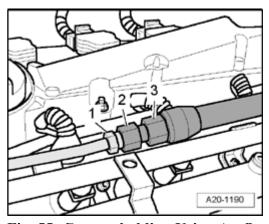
Counterholding Using An Open-End Wrench At Each Hex Head & Unscrew Union Nut Courtesy of VOLKSWAGEN UNITED STATES, INC.
